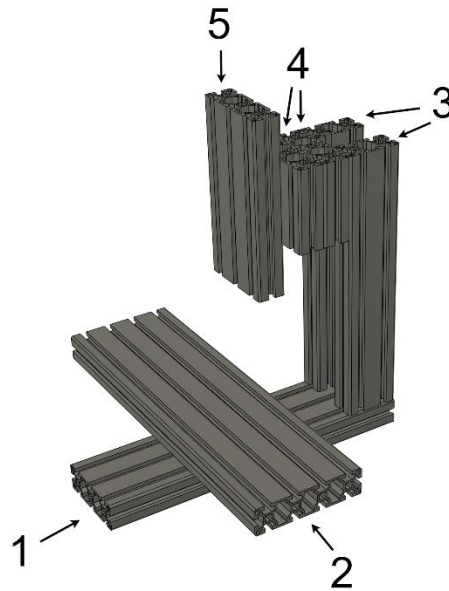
Mill extrusion frame. 1- Y-axis extrusion; 2- X axis extrusion; 3- Z tower extrusions; 4- Z tower extension extrusions; 5- Z-axis extrusion.
